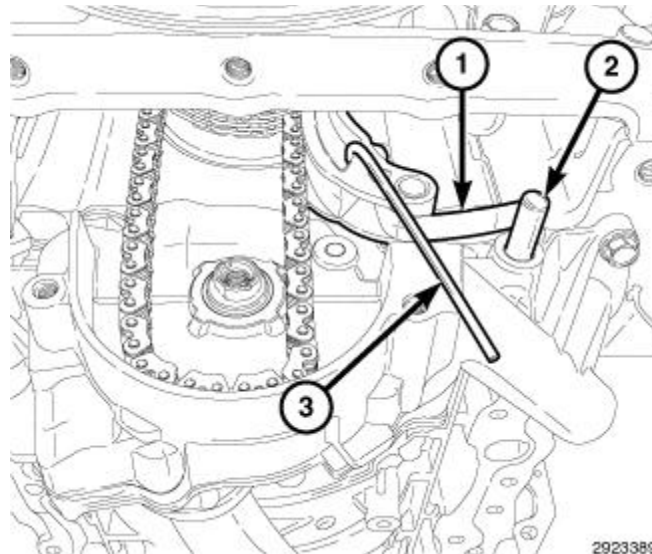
Retaining Pin, Oil Pump Chain Tensioner Spring & Dowel Pin
